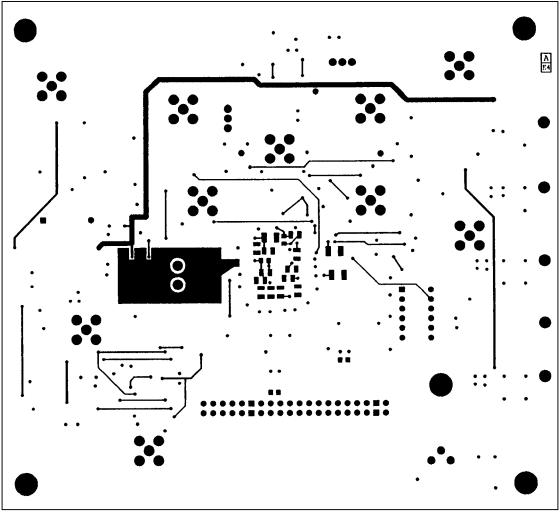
MAX2101 EV Kit PC Board Layout—Solder Side (Positive Image)
